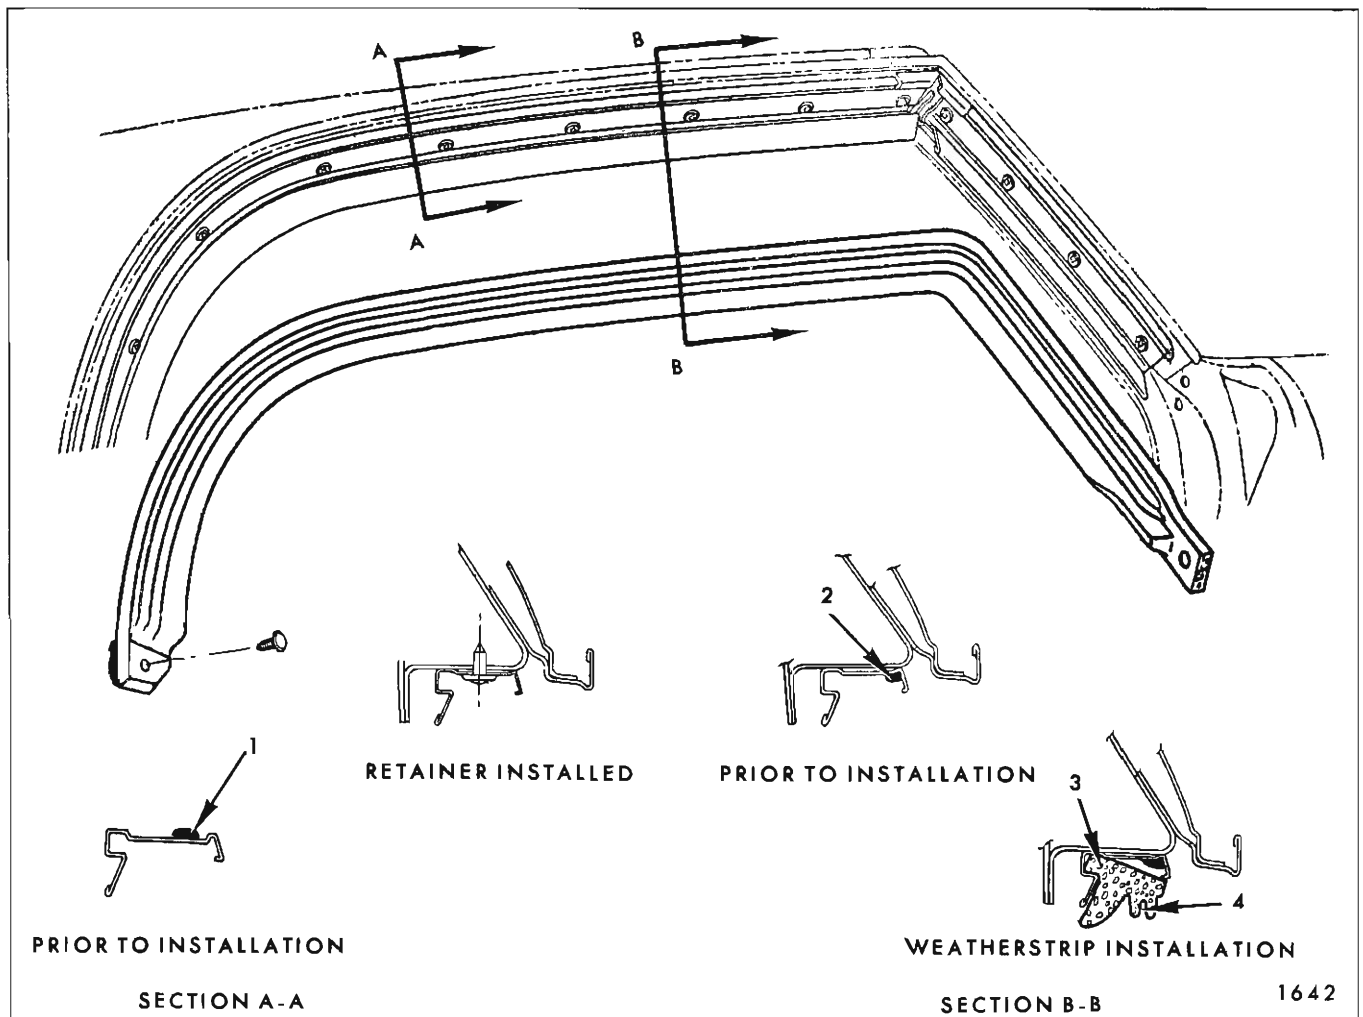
D11—Side Roof Rail Weatherstrip Installation
